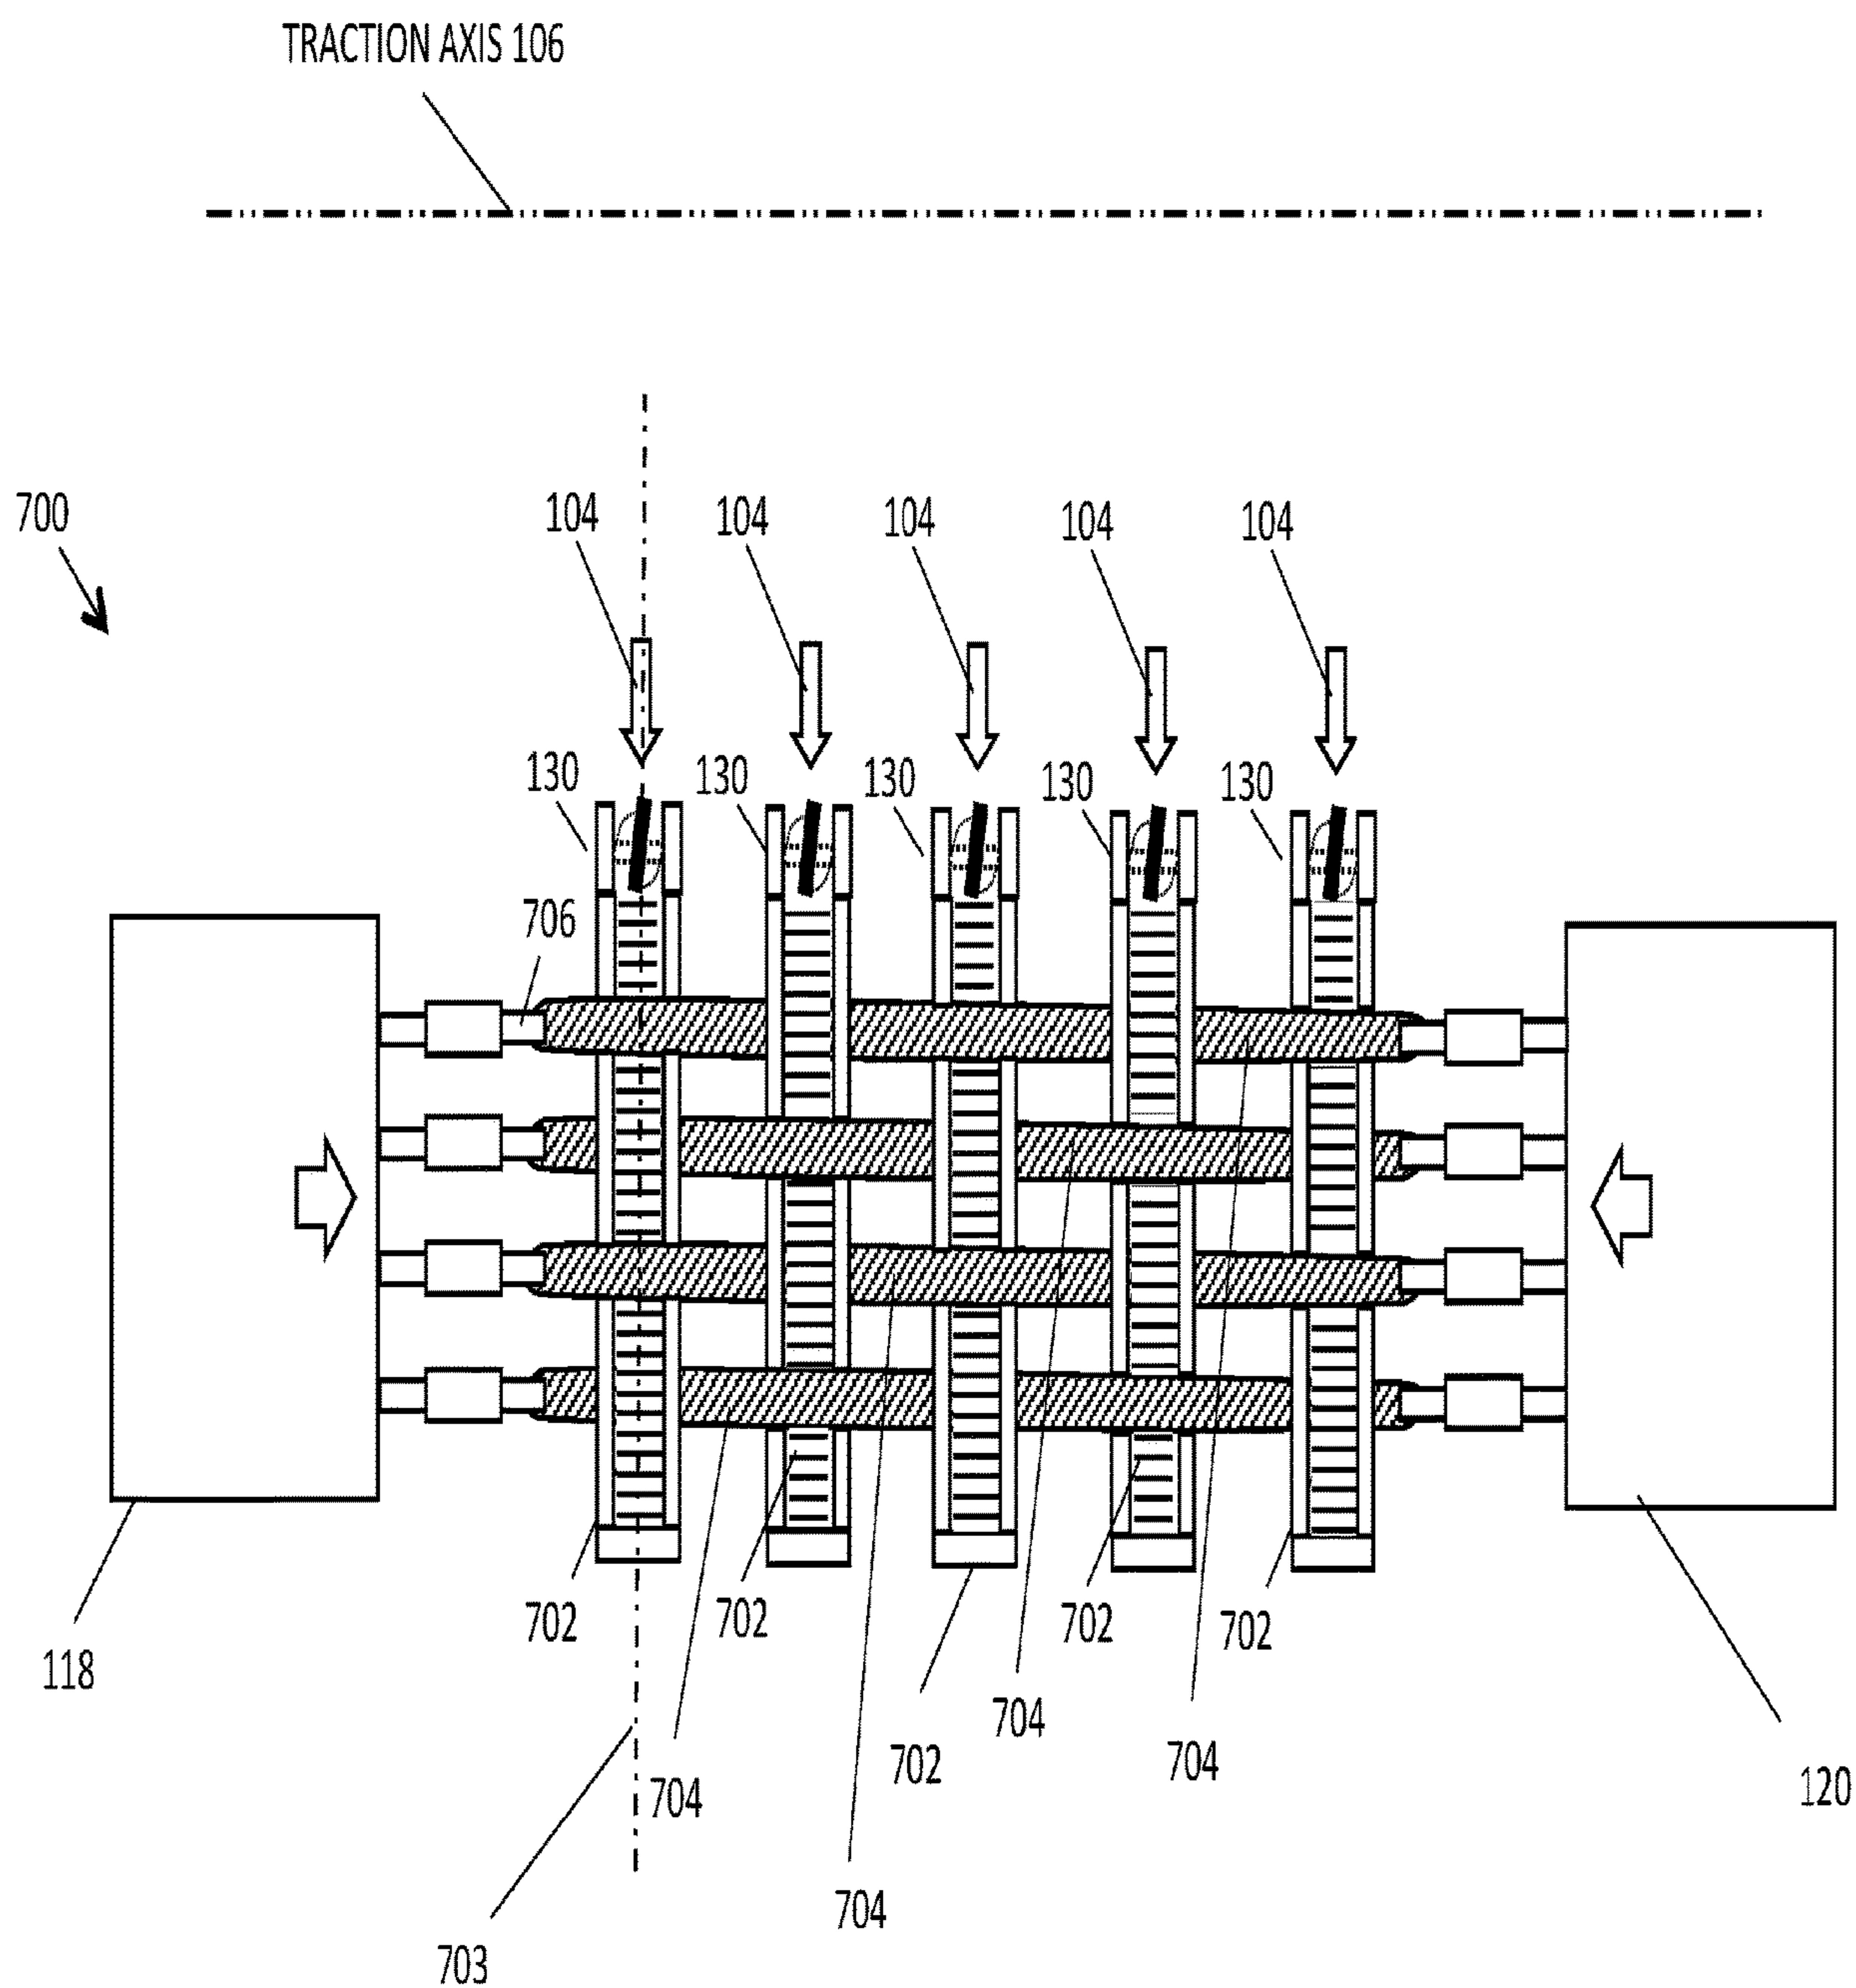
D: TRUE TOP VIEW, COMPRESSED POSITION
